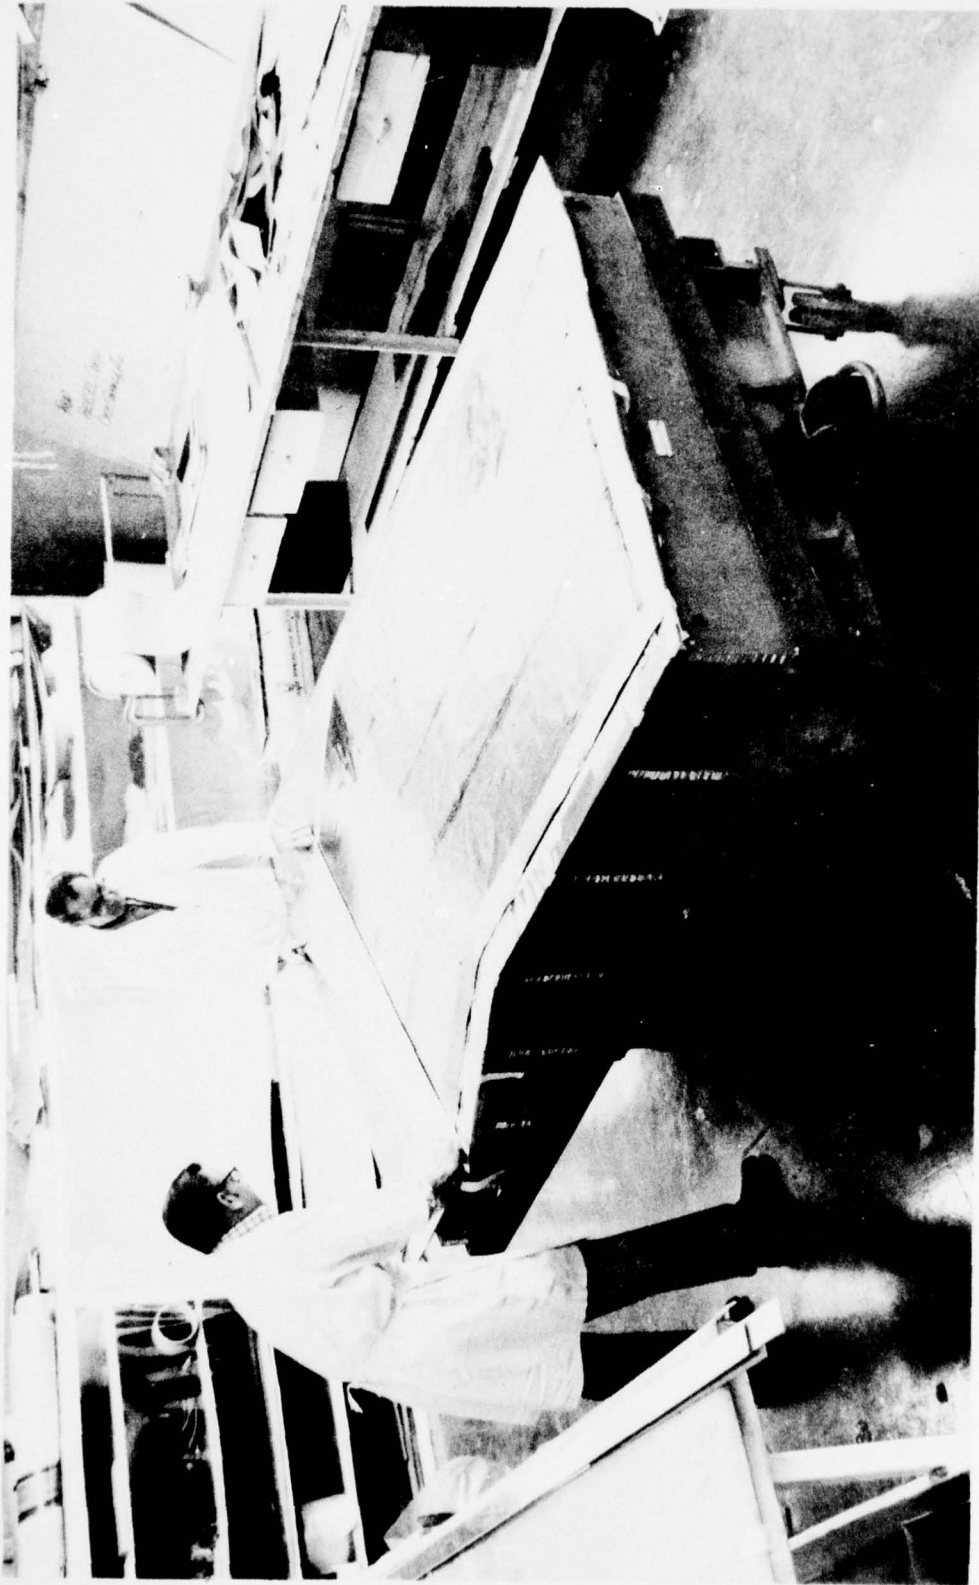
LAYUP OF LOWER SKIN PANEL FACING
